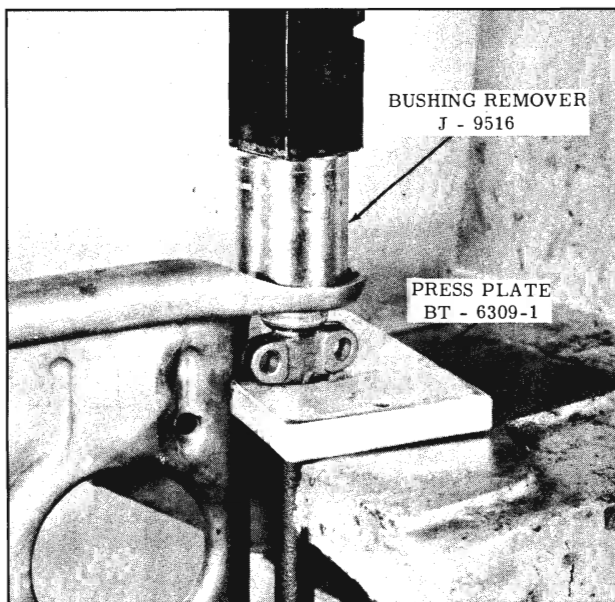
Partial Pivot Shaft Bushing Removal
